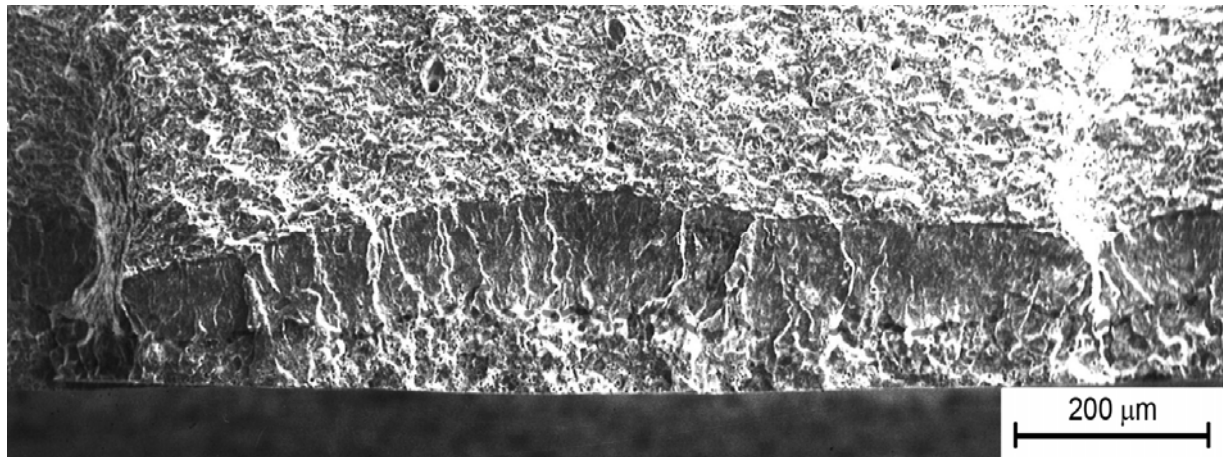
Case History 20.5.2 – A Broken-Open Crack Showing Intergranular Fracture Followed by Transgranular Fatigue Fracture and Overload Fracture.
